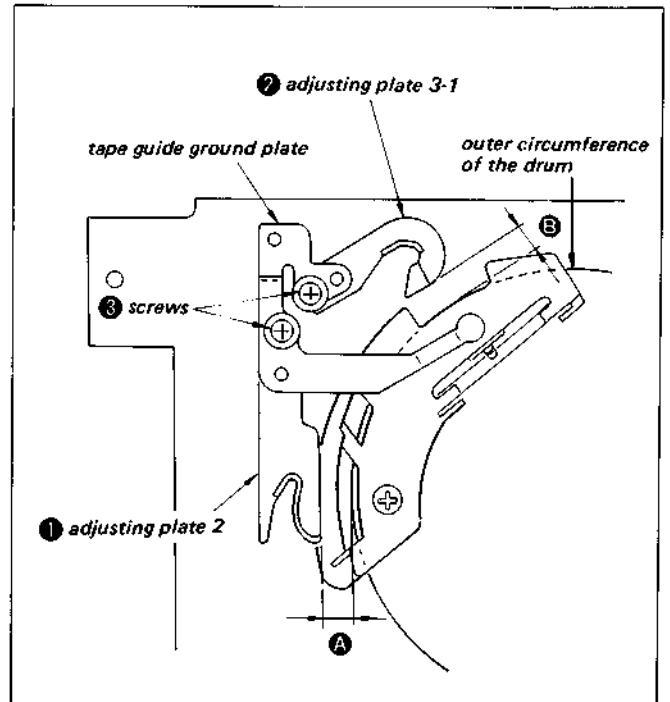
Measurement of the position of adjusting plates 2 and 3-1
